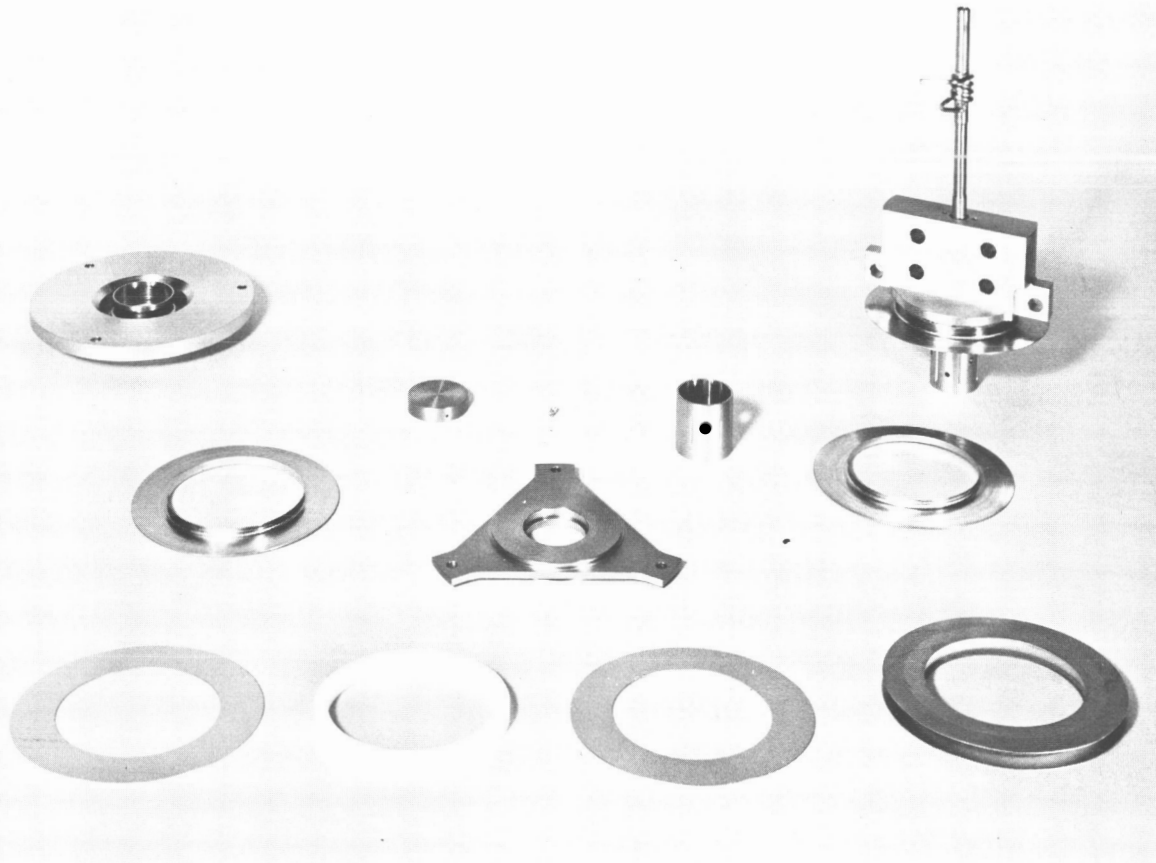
VPTV COMPONENTS AND SUBASSEMBLIES PRIOR TO FINAL JOINING
